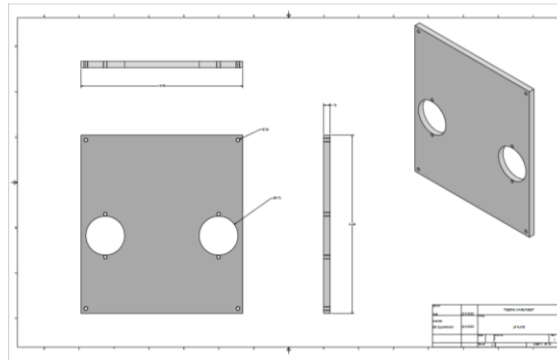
Upper Board - The upper board is where the motor and ring loader are located.
